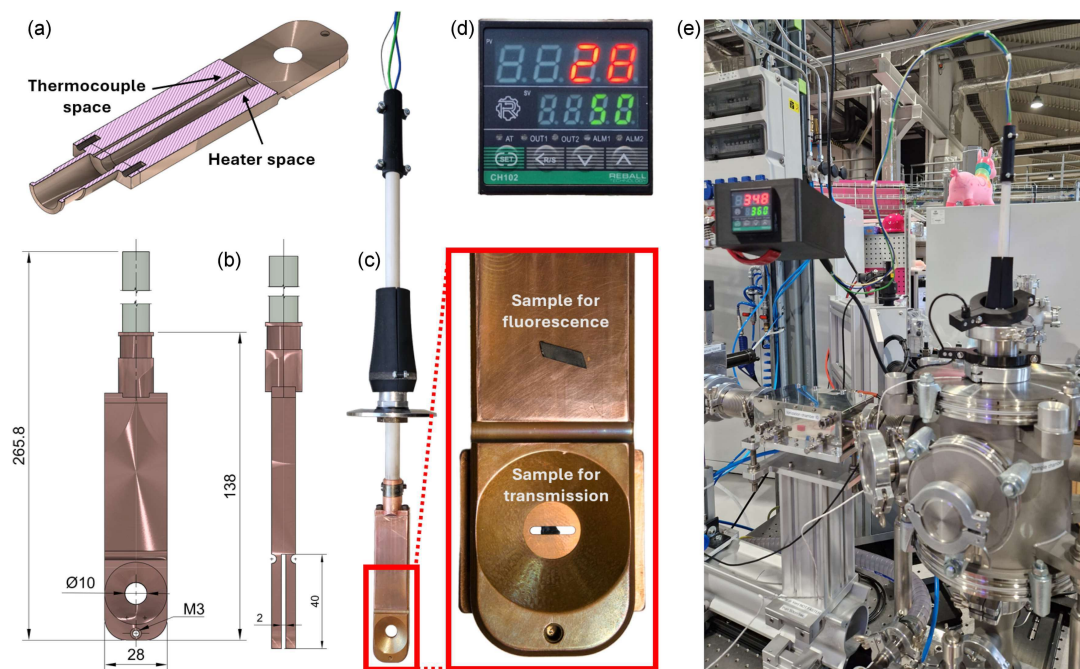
High-temperature XAS setup developed for the ASTRA beamline at the SOLARIS Centre. (a) Cross-sectional view of the copper sample holder, highlighting the dedicated grooves for the cylindrical heater and thermocouple to ensure uniform and controlled heating of the sample area. (b) Schematic with key dimensions of the holder, including sample mount geometry and mounting interfaces. (c) Assembled sample holder mounted on a KF-50 vacuum flange, with ceramic insulation for thermal and electrical isolation. The inset shows designated positions for XAS measurements in transmission and fluorescence modes. (d) Temperature controller used to regulate the heater, displaying both the setpoint and actual process value from the thermocouple. (e) Operational view of the high-temperature holder integrated into the experimental chamber at the ASTRA beamline, illustrating its compatibility with the beamline infrastructure and control systems.
